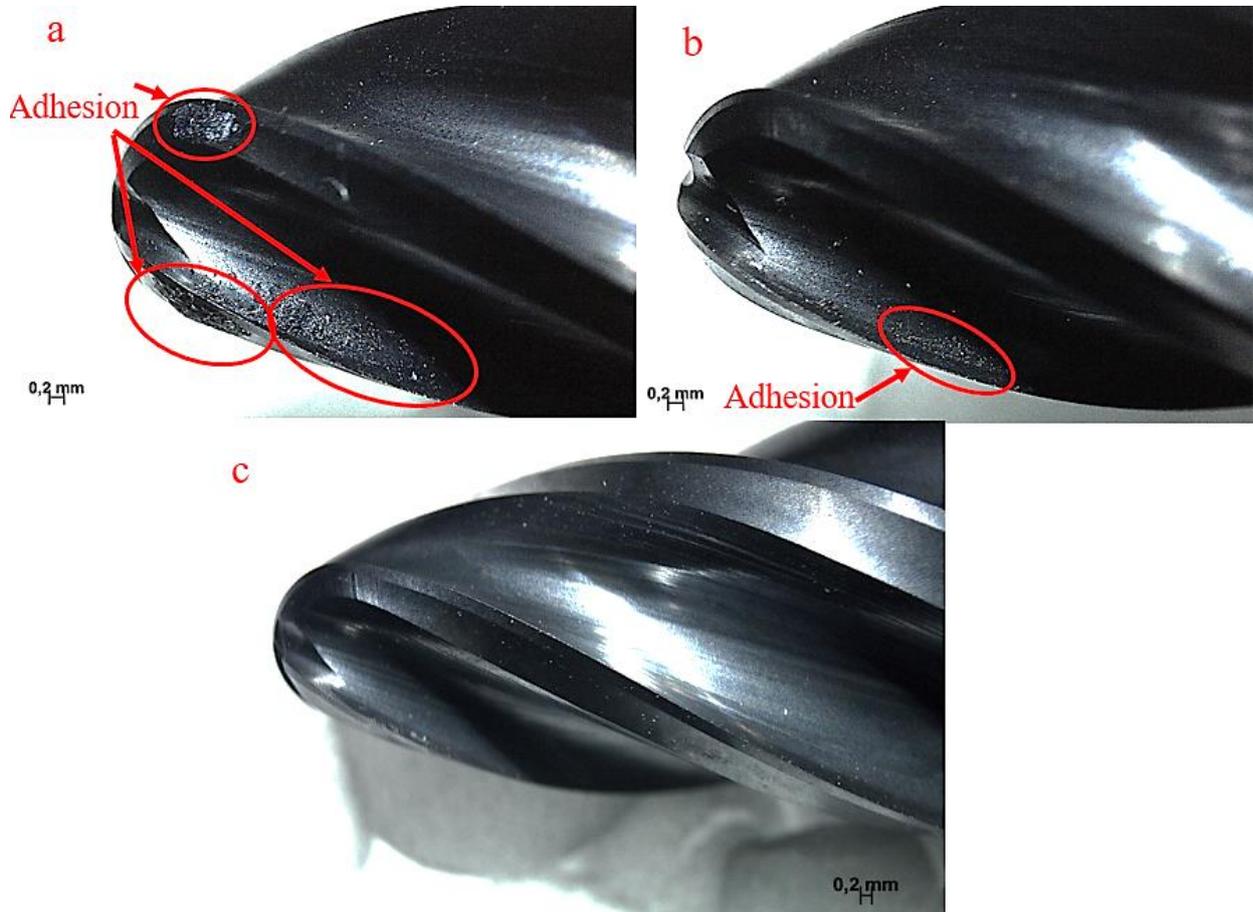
Tool images a) cold air-cooling b) air cooling c) new tool.
